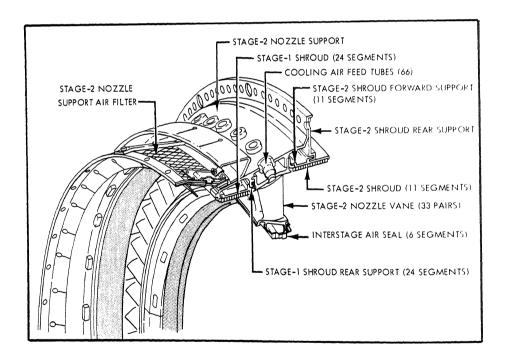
Second-stage high-pressure turbine nozzle.
